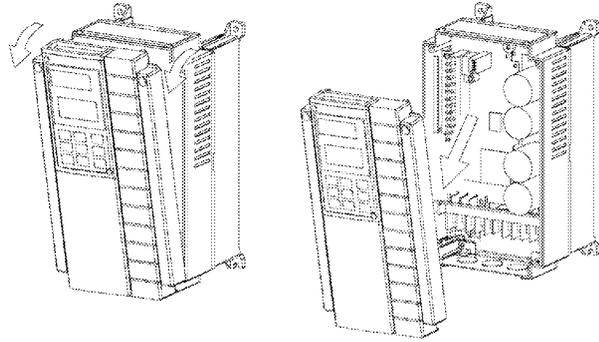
Removing the surface cover (for inverter of 22 kW or less)
